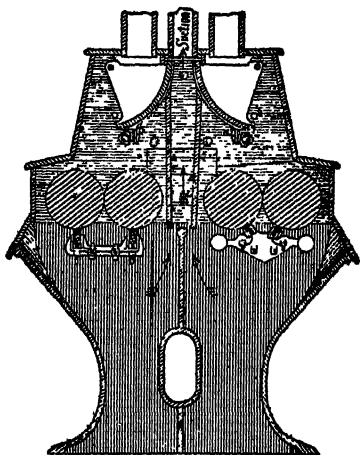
SECTION OF A MODERN ROLLER MILLING MACHINE.
